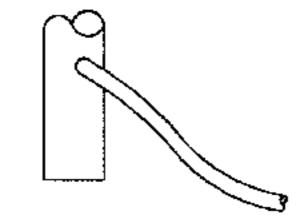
is an exploded side elevational view of the embodiment disclosed in FIGS. 4–6, showing the configuration of the base portion; and,
